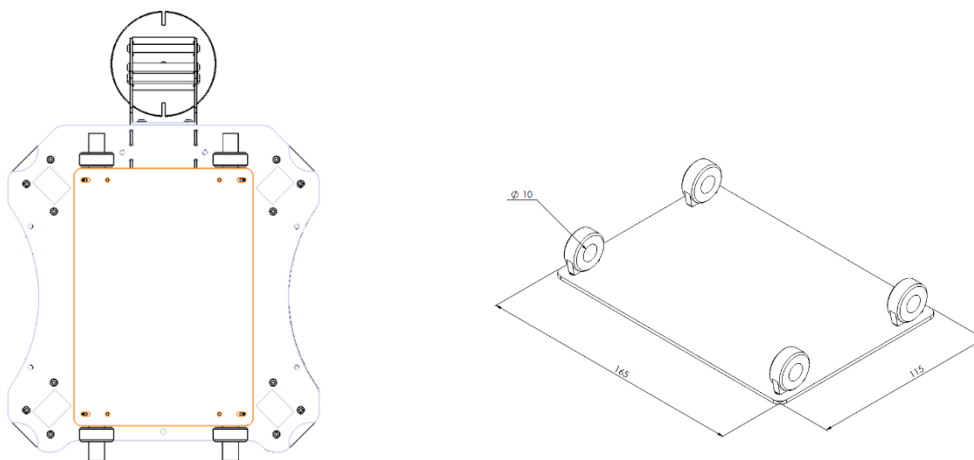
DR750 Customized payloads plate mechanical interfaces scheme
